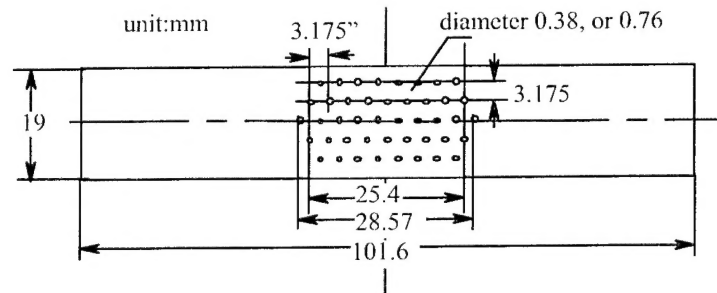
Four-point-bend test specimen with center holes arrangement for the combined laser thermo-mechanical fatigue test.
